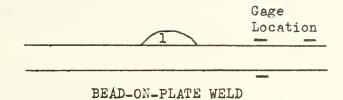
WELDING PASS SEQUENCE.
